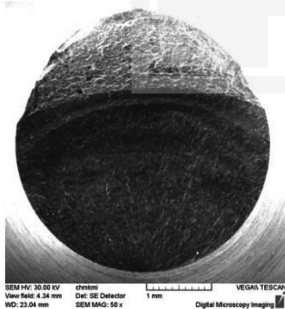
Fatigue fracture of specimens on a macro scale: surface fatigue crack initiation for steel Hardox 450
